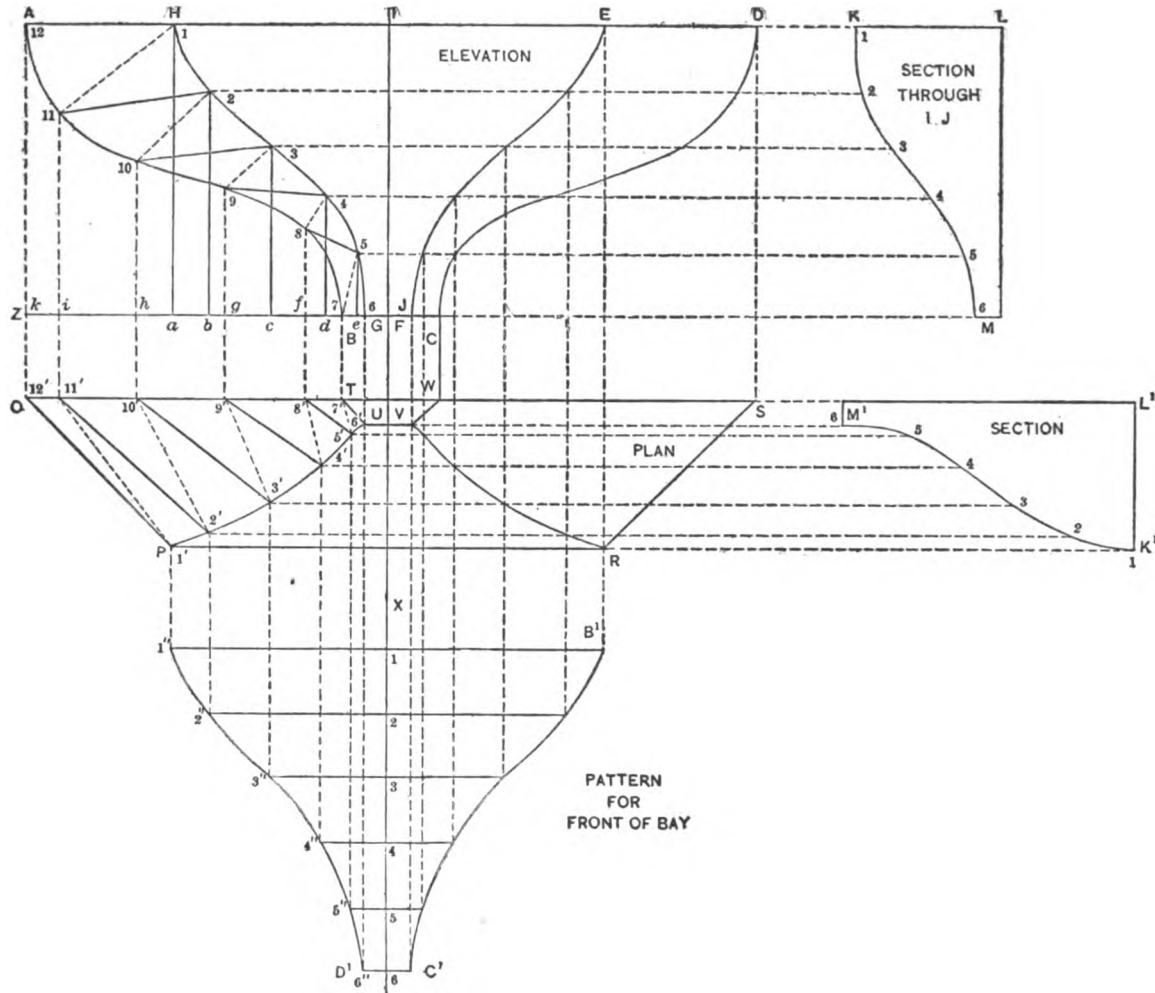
Detail of Bottom of Bay, True Sections and Pattern
